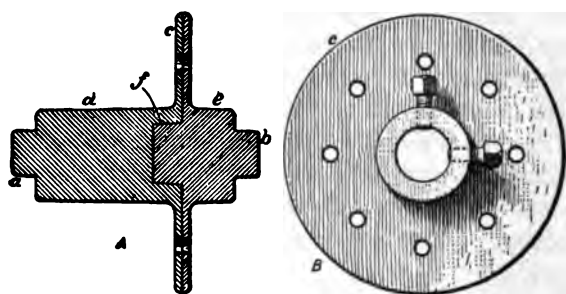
Sectional and Side View Flanged Pulley Hub.
